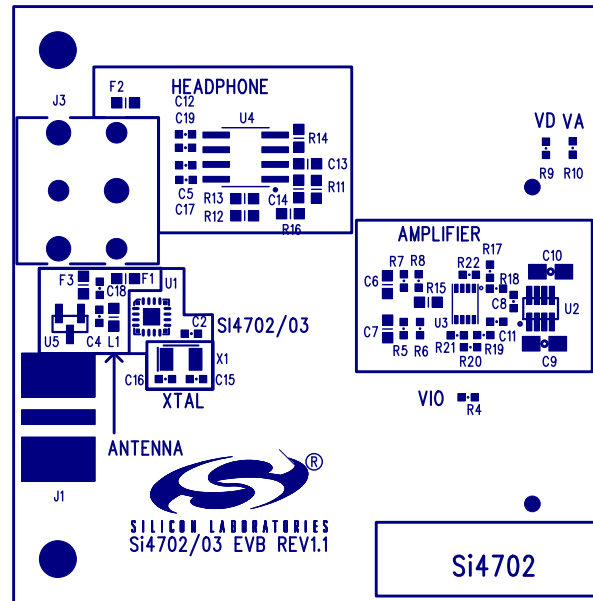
Si4702/03 Daughter Card—Primary Assembly Silkscreen
